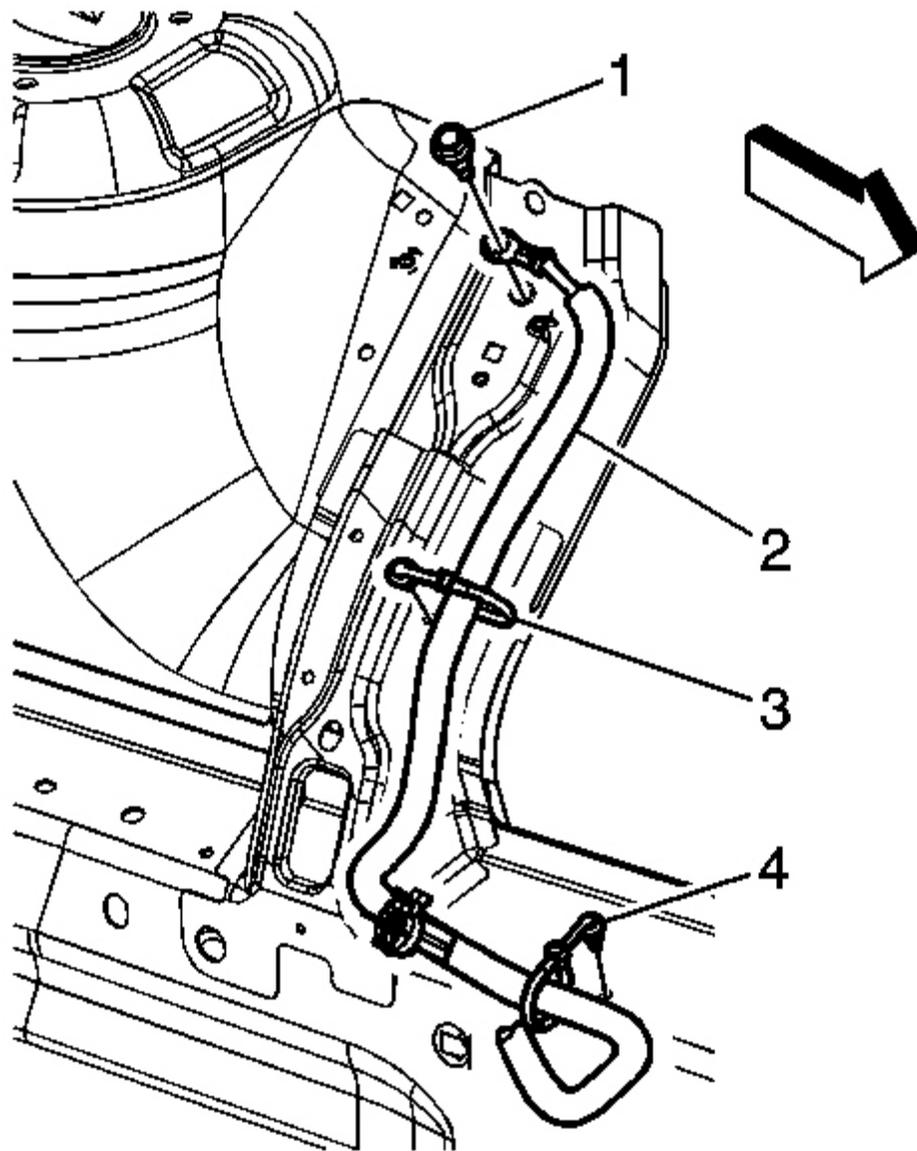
Identifying Battery Negative Cable Extension Cable Clip
